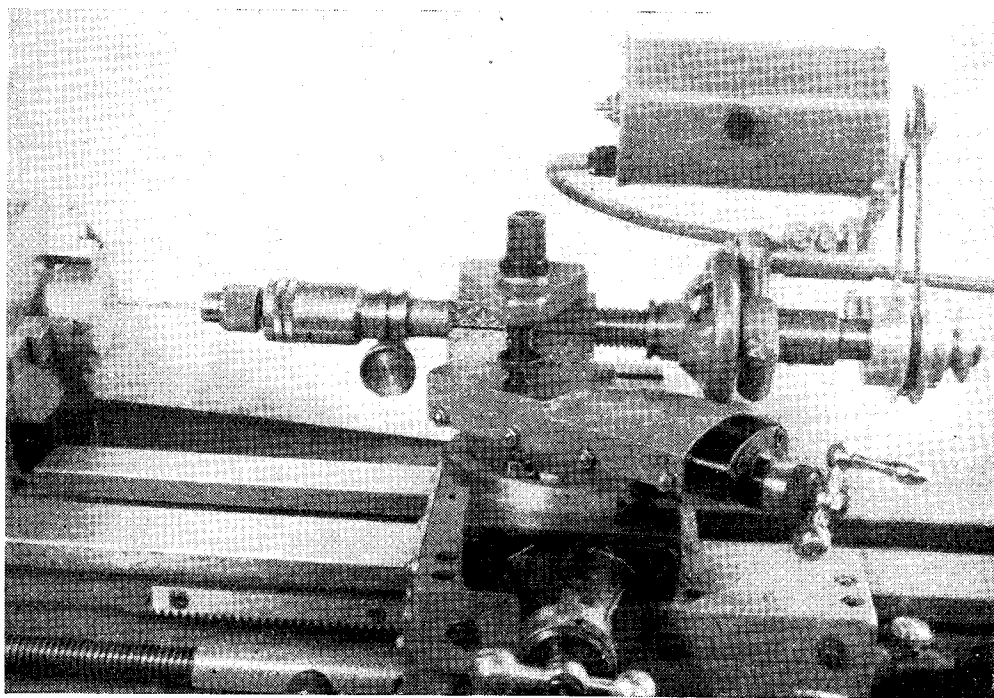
The spindle in use on a Myford M.L.7 lathe
